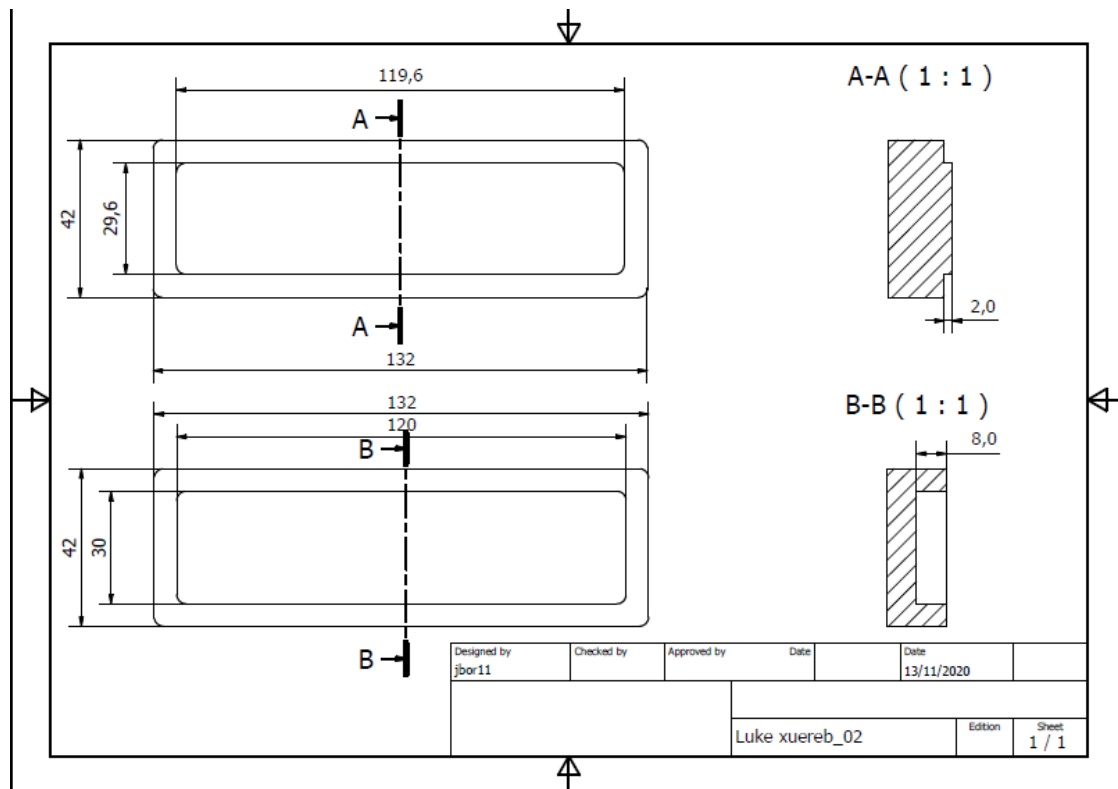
Engineering drawing of the mould used in this SOP. Drawn by J. Borg.
